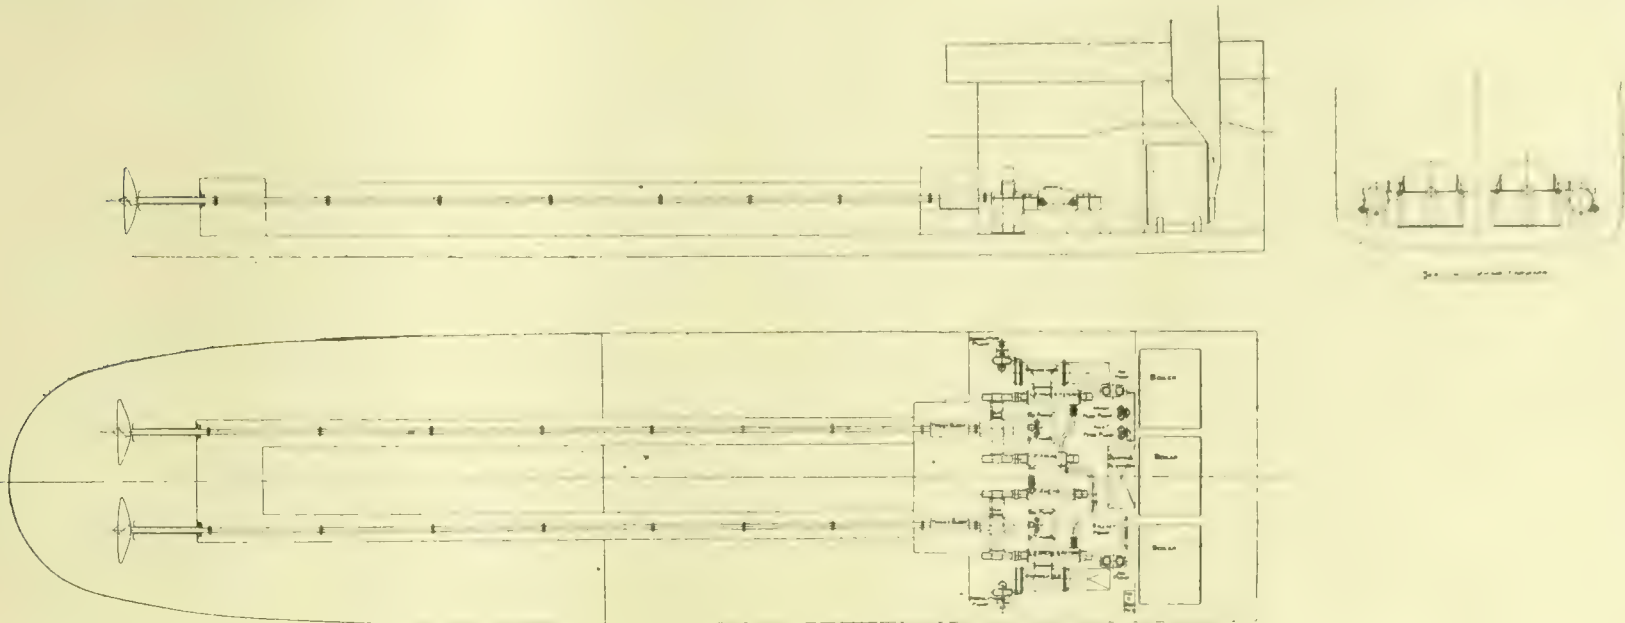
TWIN SCREW CARGO STEAMER. Arrangement of Turbines and Gearing.
